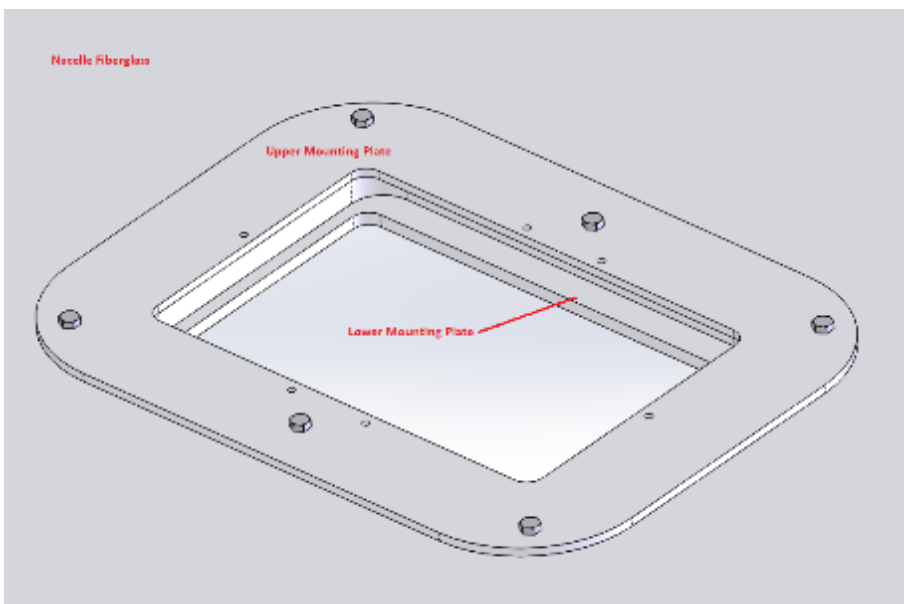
Image of upper and lower mounting plates secured above and below the nacelle, respectively.
